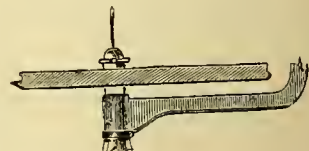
SAW FRAME IN NOTCH IN CUTTING BOARD.
